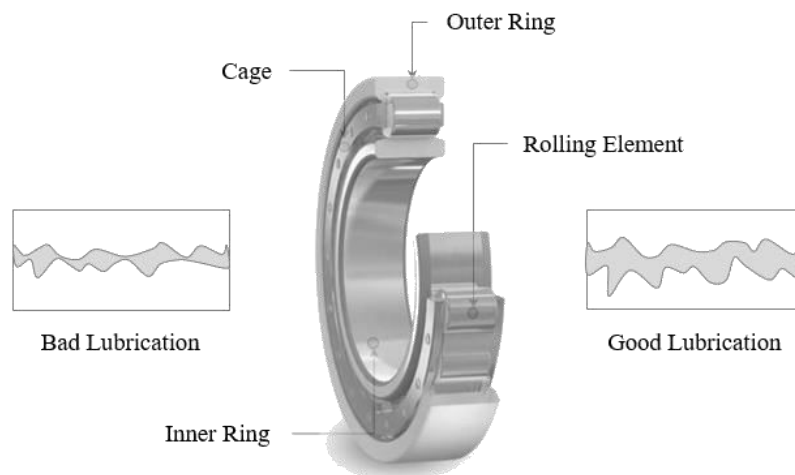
Bearing lubrication (Bad and Good Lubrication).
